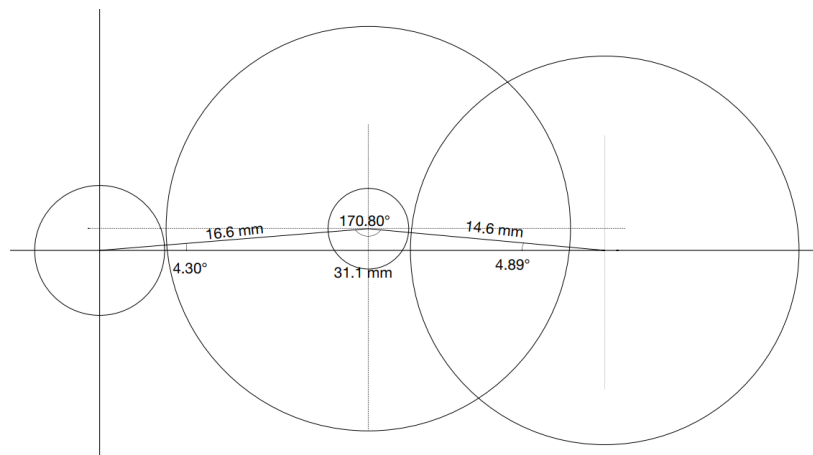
The design of the gearbox plotted showing the PCD between the gears.
